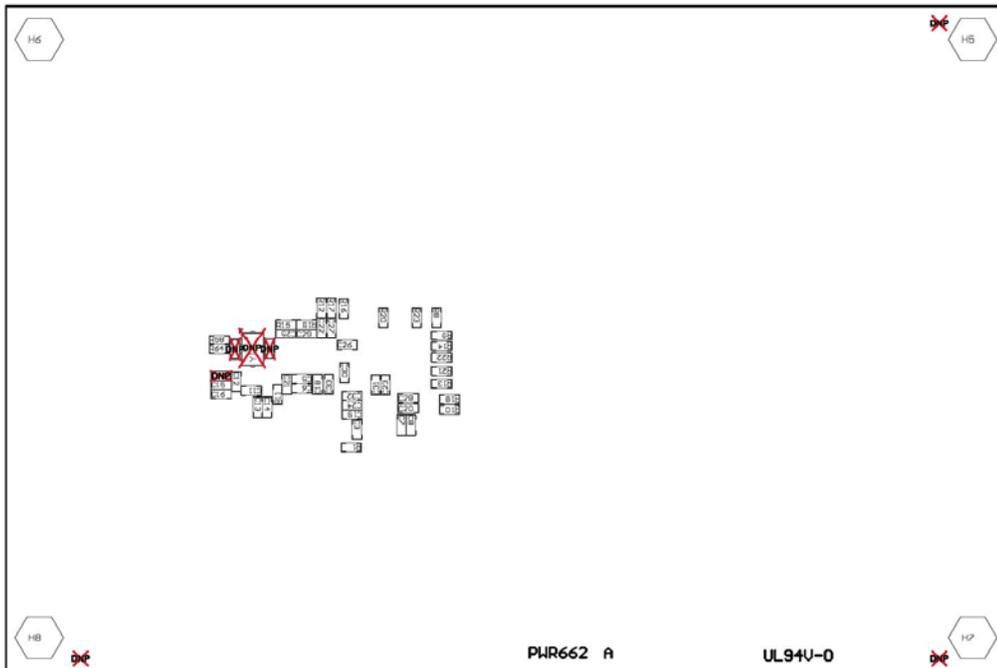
UCD3138A64OEVM-662 Bottom Assembly Drawing (Bottom view)
